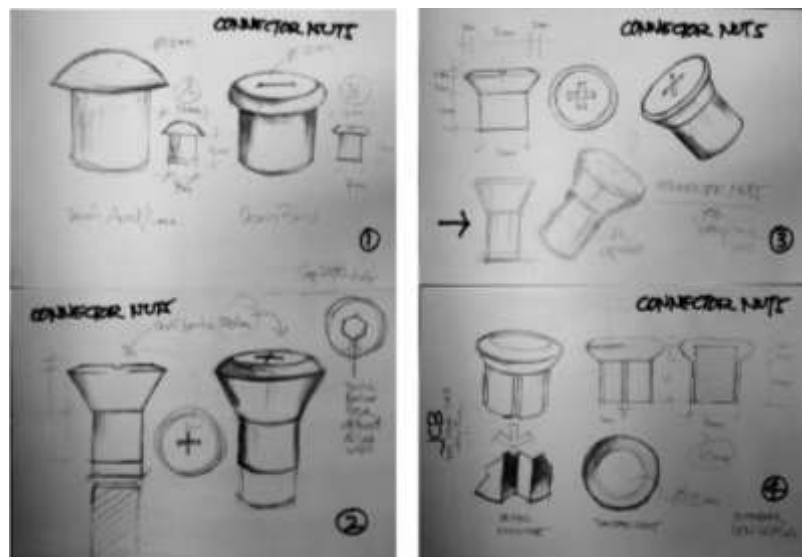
Design concept of nuts connector product on bolts joint connector (JCB)
